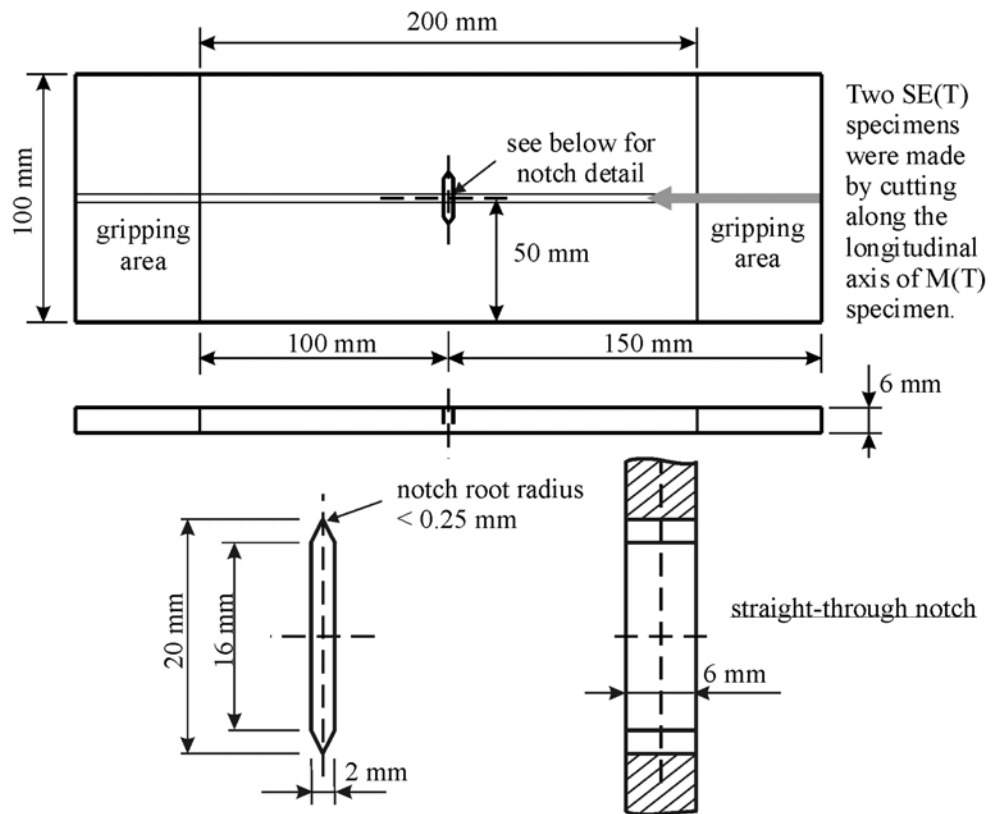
Geometry and Notch Detail of Crack Growth Rate Specimen
